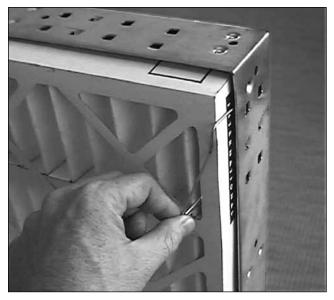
Place the end of the latch over the filter frame, securing the filter to the frame.
